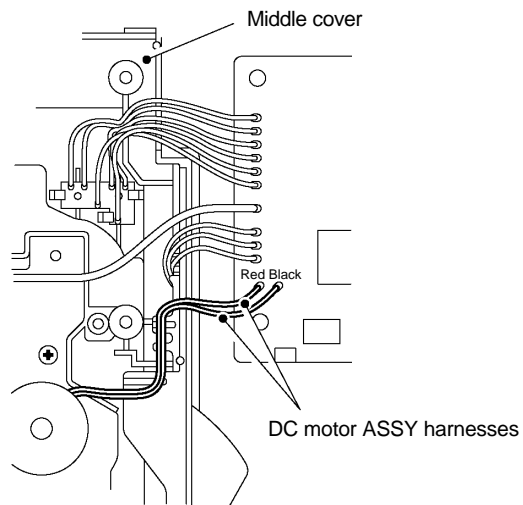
Assembling the Main PCB ASSY (2)
